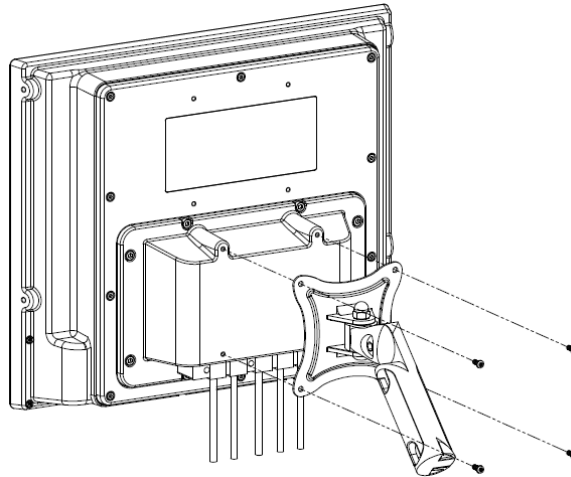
VESA Mounting Using the Cable Entry Cover
